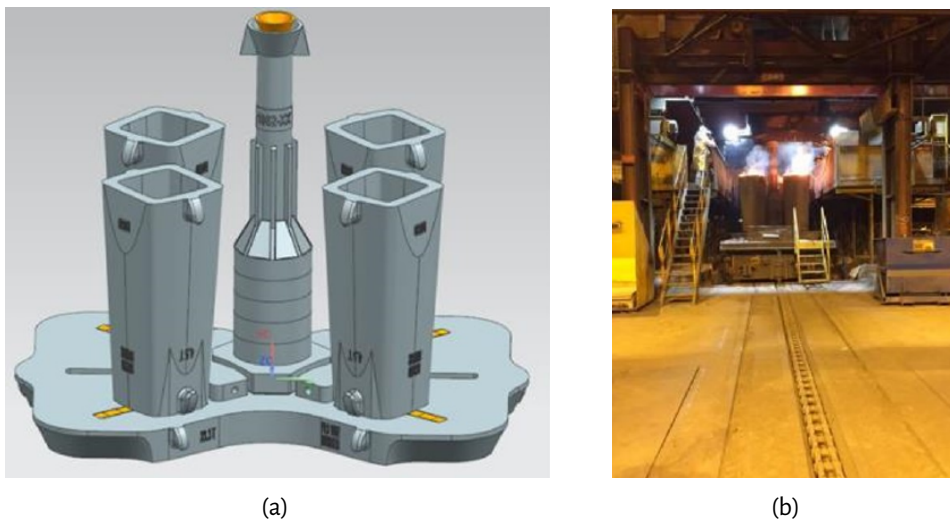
a) Schematic representation of the casting setup and b) actual photo of the casting setup [161]
